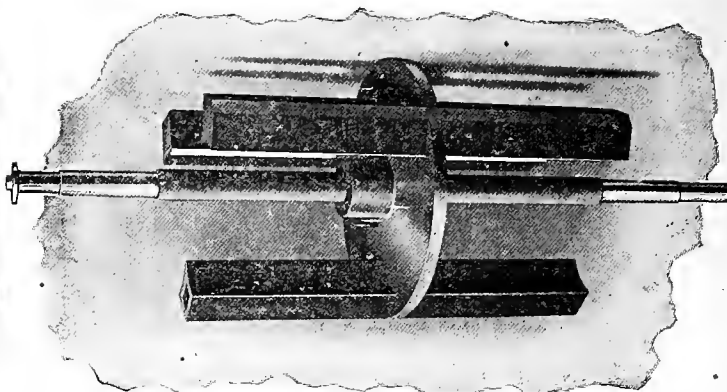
STATIONARY CORE WHICH IS PLACED OVER IMPELLER SHAFT.
